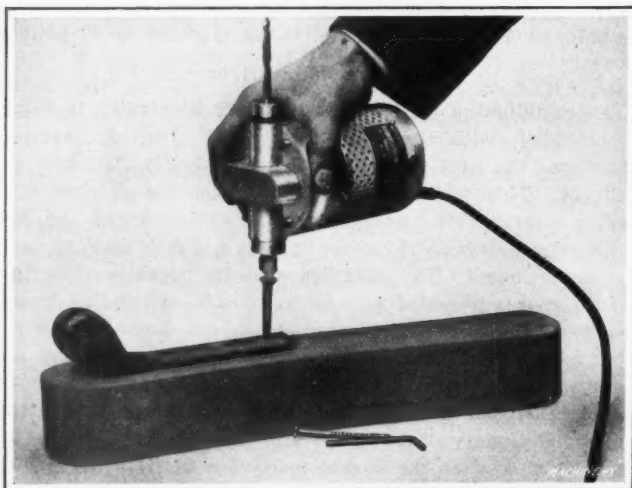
Automatic Electrical Tool Co.'s Combination Drill and Screwdriver
